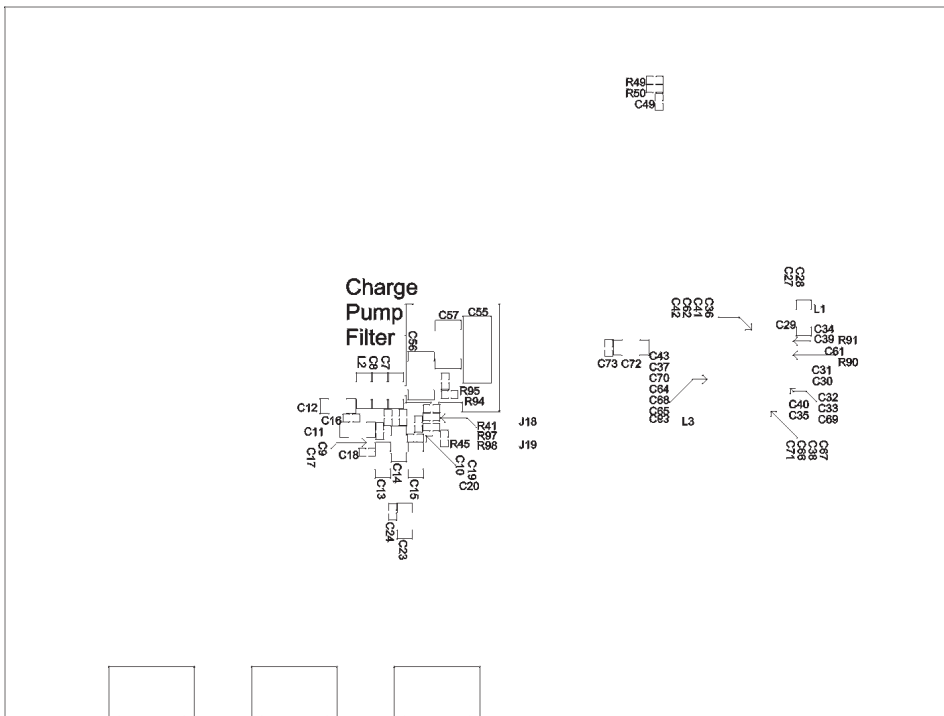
TSW2000 EVM Layout, Bottom Silk Layer
